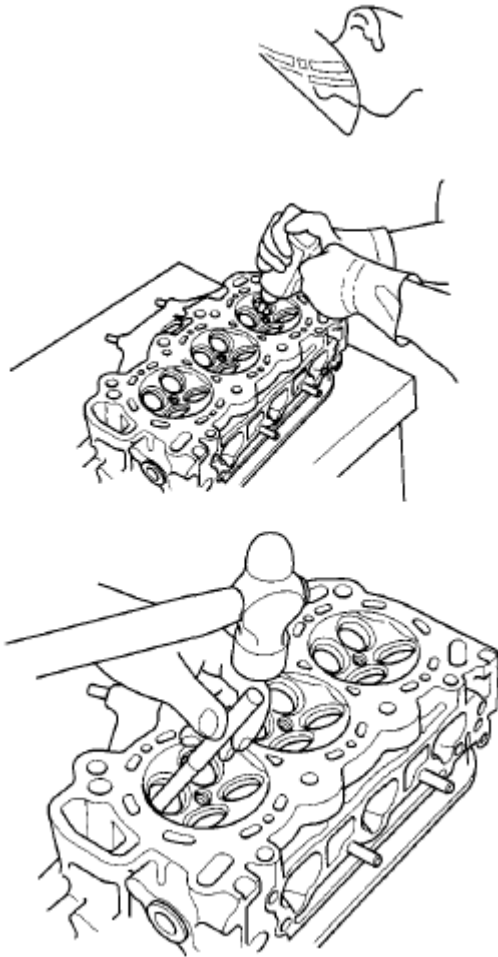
Driving Guide Out Toward Camshaft Side Of Head
